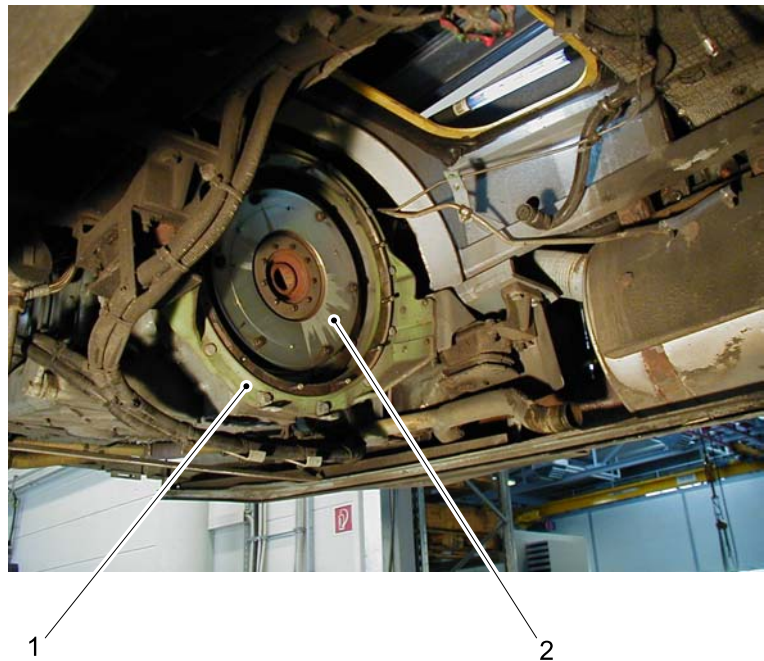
1 – Suspension flange, 2 – Hydrodamp
